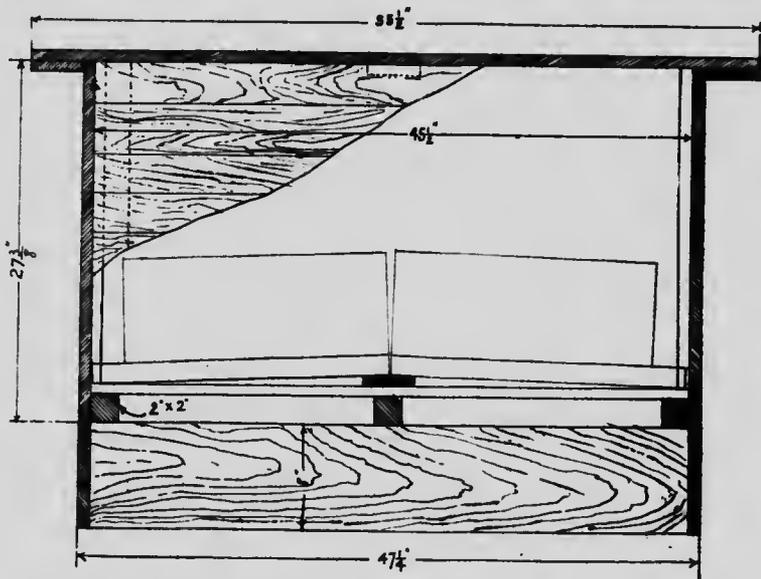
Side elevation of 4-hive Wintering Box, with side cut away to show construction.
